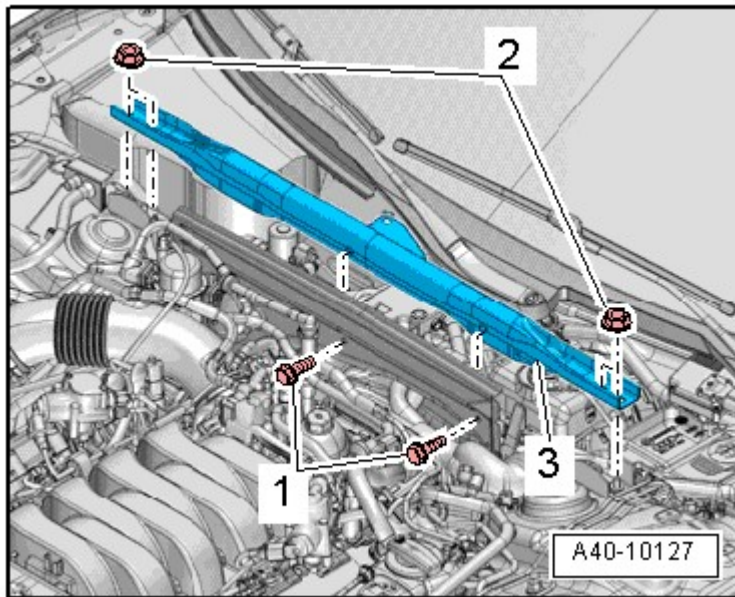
Identifying Bolts, Nuts And Tower Brace
